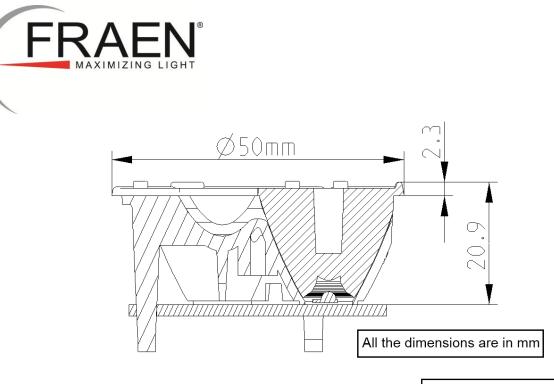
Cross-section view of the assembly shows the lenses touching the PCB. The assembly holder provides proper alignment between the lenses and the LEDs.
